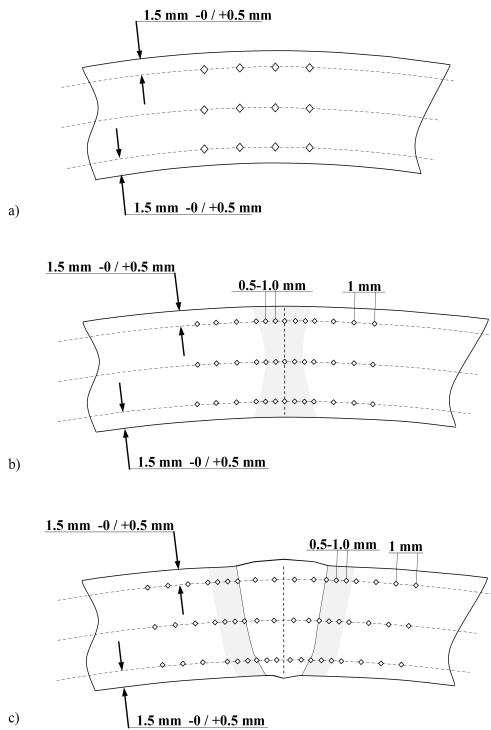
Hardness locations in a) seamless pipes, b) HFW pipe, and c) fusion welded joints.
